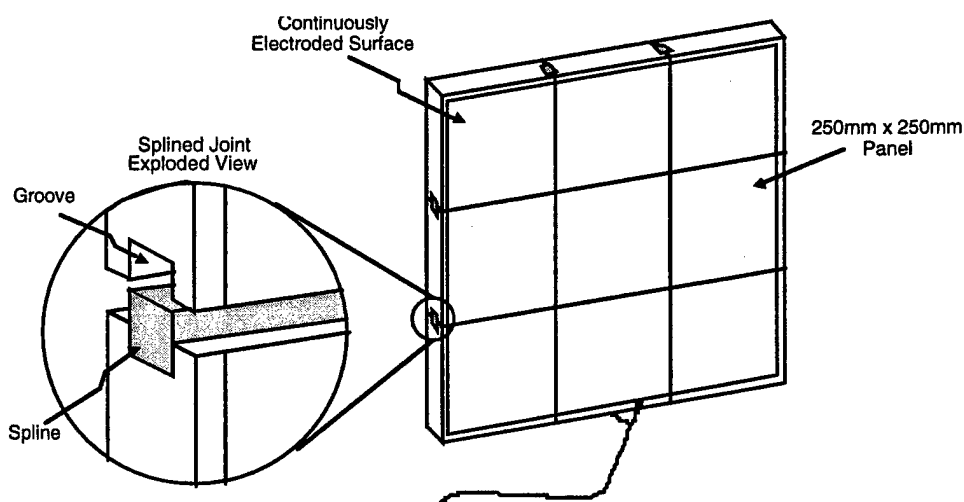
Construction of 750 x 750 mm SonoPanel, Design #2.
